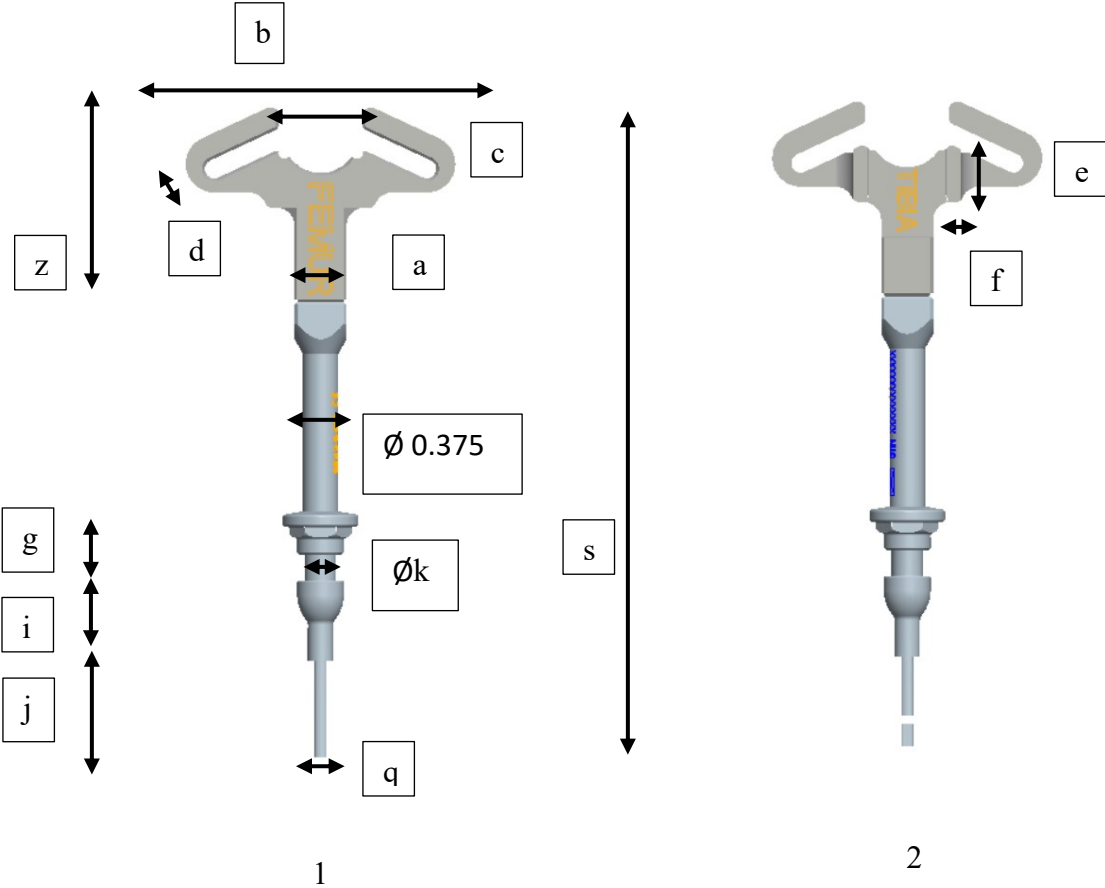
Front view of universal counter wrench, 2. Back view of universal counter wrench
